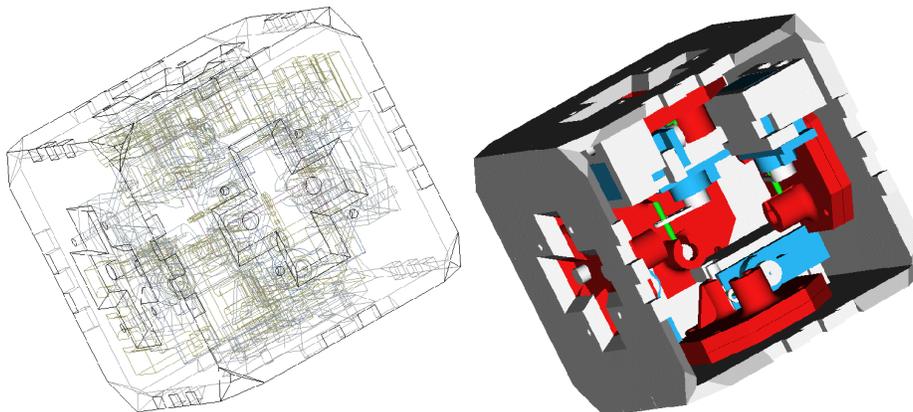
A cube with six cross-shaped attachment points (shaded image has one face removed).
